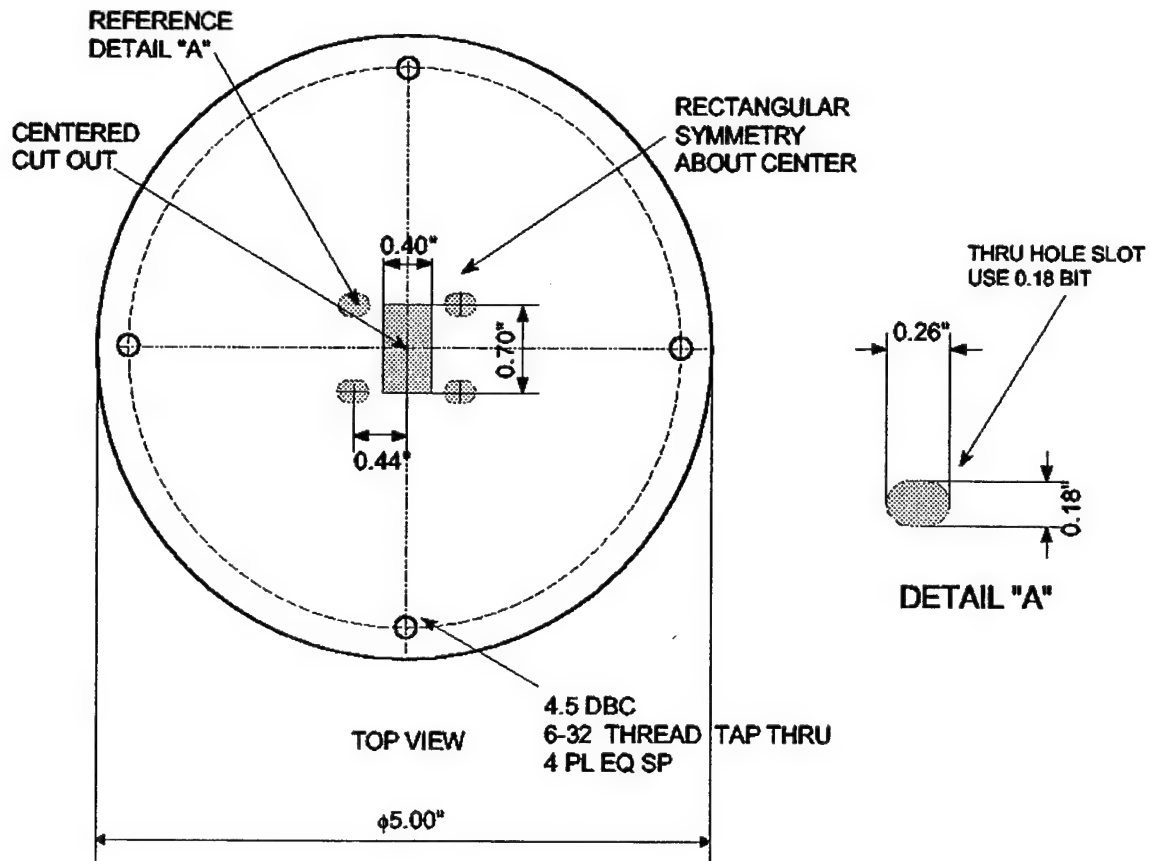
Engineering drawing of the vacuum feed-through flange.
